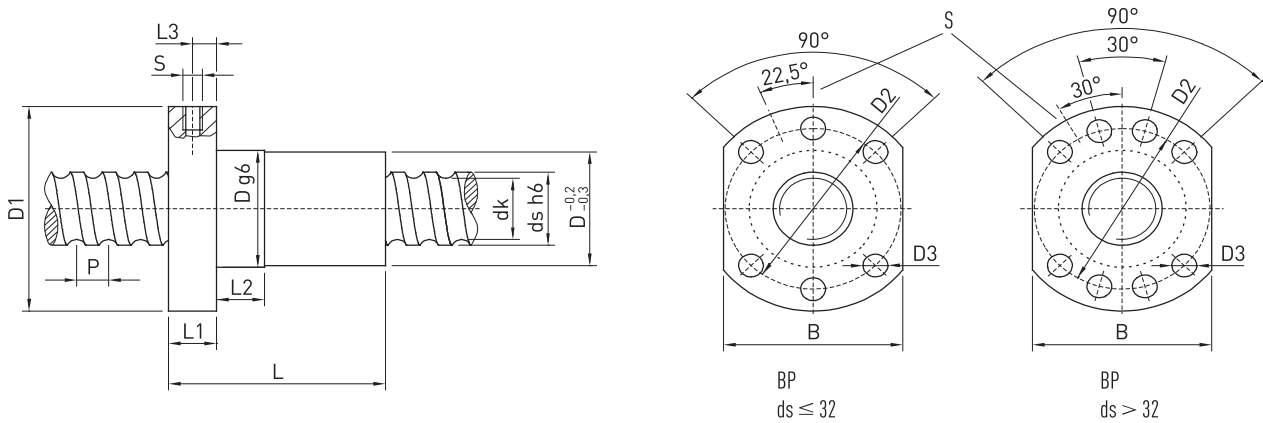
Flange single nut DEB-x with Wiper N and F
